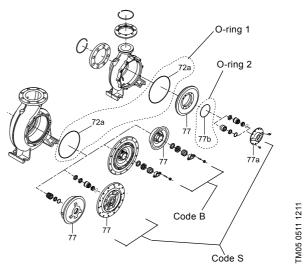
Static pump O-rings for seal arrangement "S" and "R'
